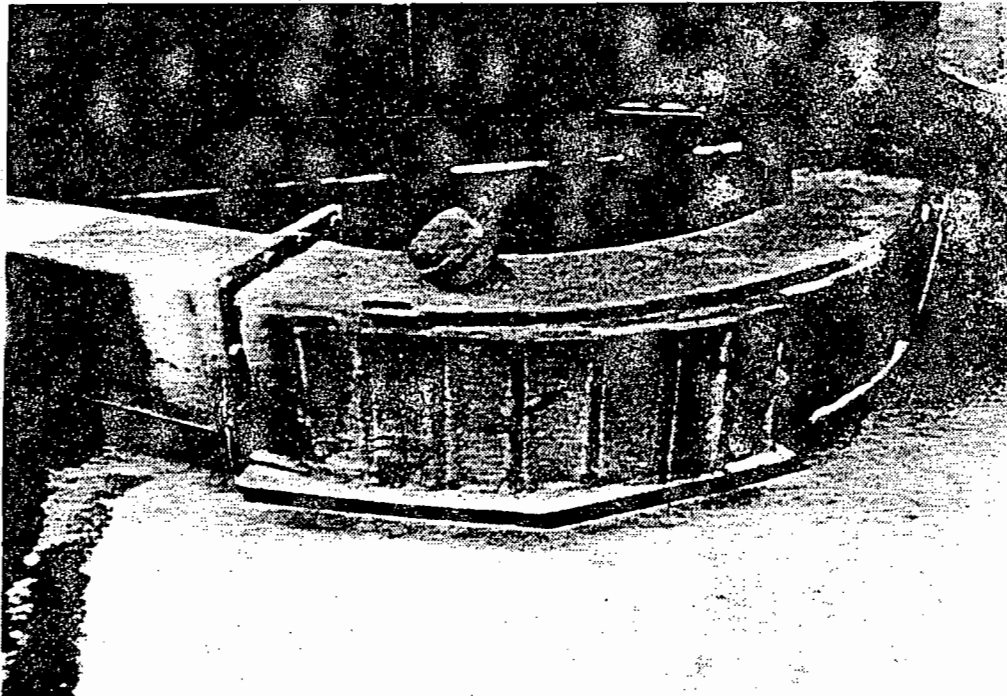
Secondary air ductwork reinforcement used to prevent abrasive failure.
